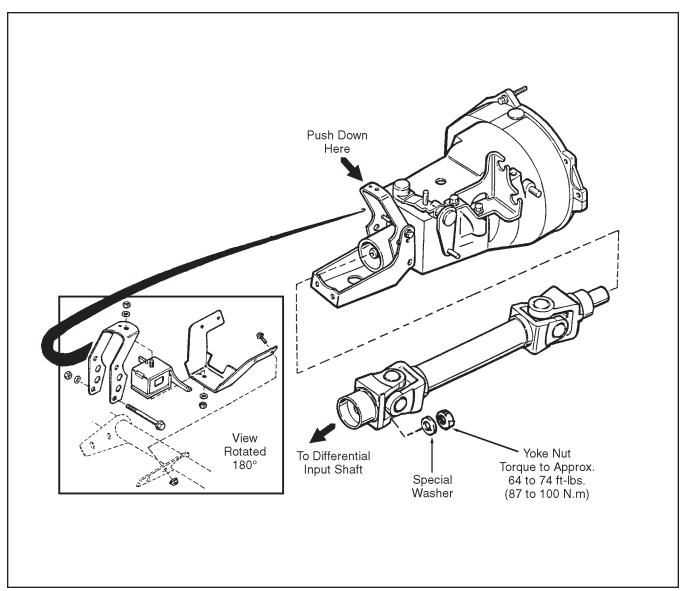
C-1. Drive Shaft Removal and Installation — Vehicles with 3-Cylinder Gasoline Engines
